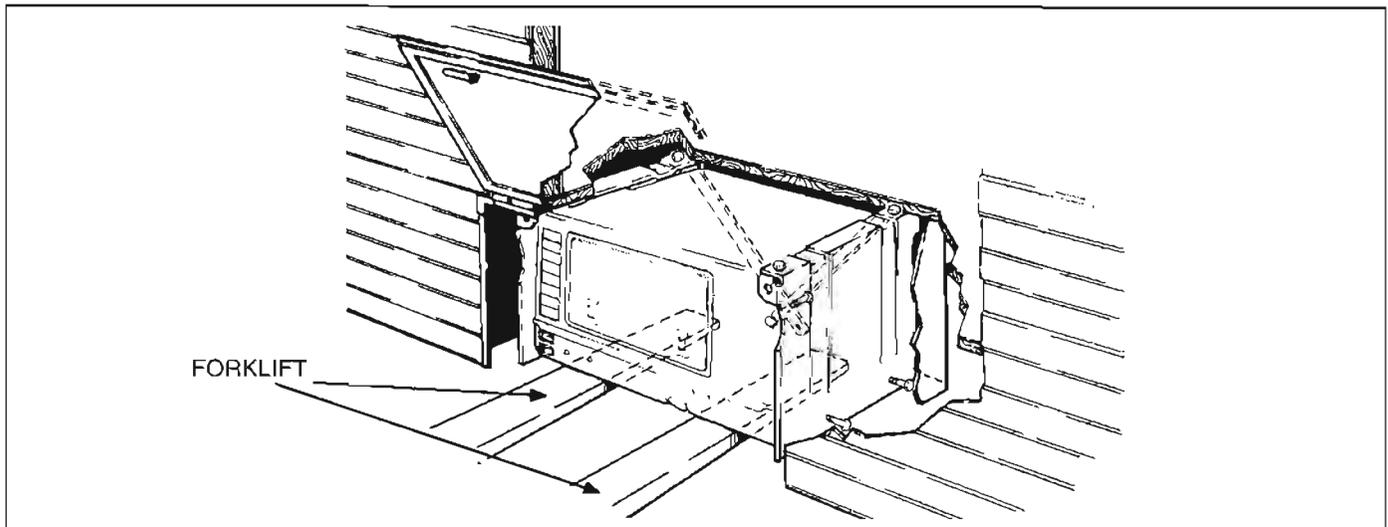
COMPLETE SET REMOVAL (MODEL KV)
